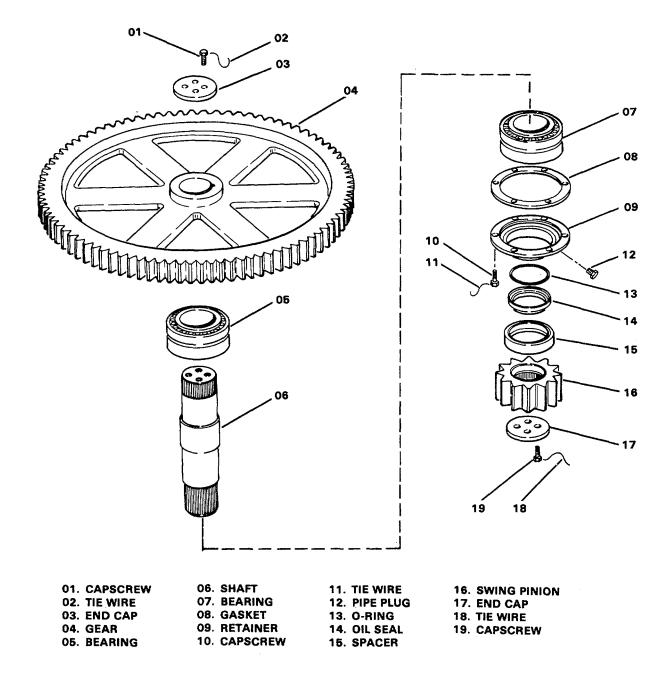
C-3. Vertical Swing Shaft (910J360-1)
